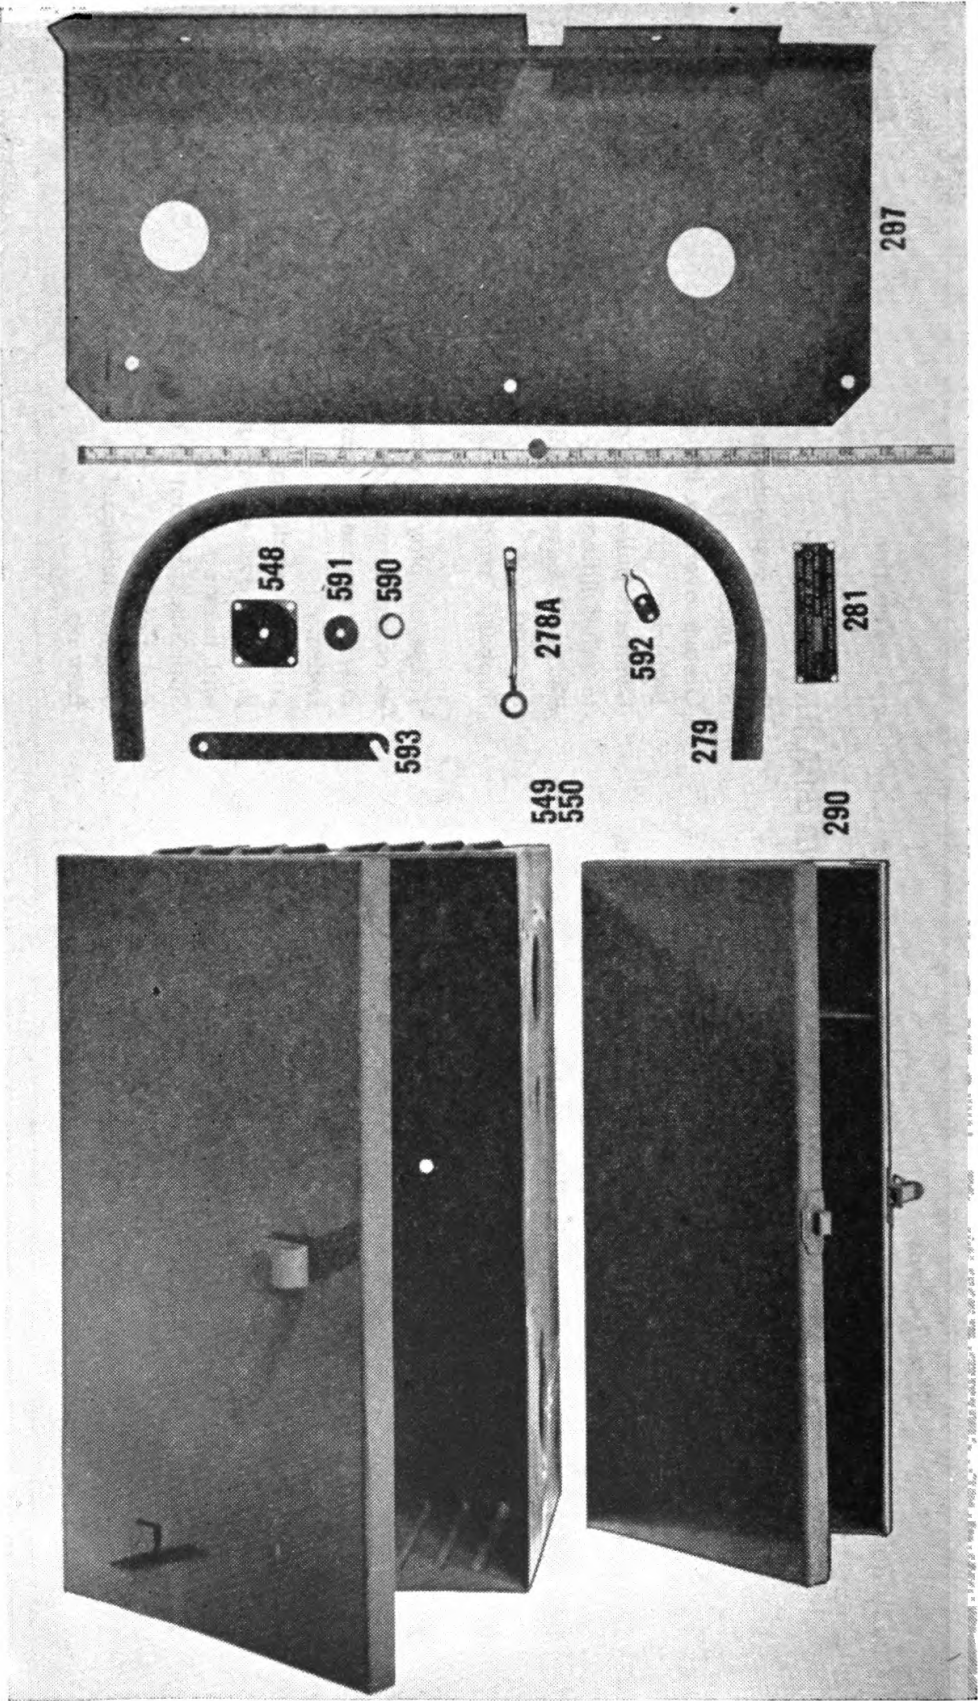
CONTROL BOX, TOOL BOX AND BELT GUARD GROUP
